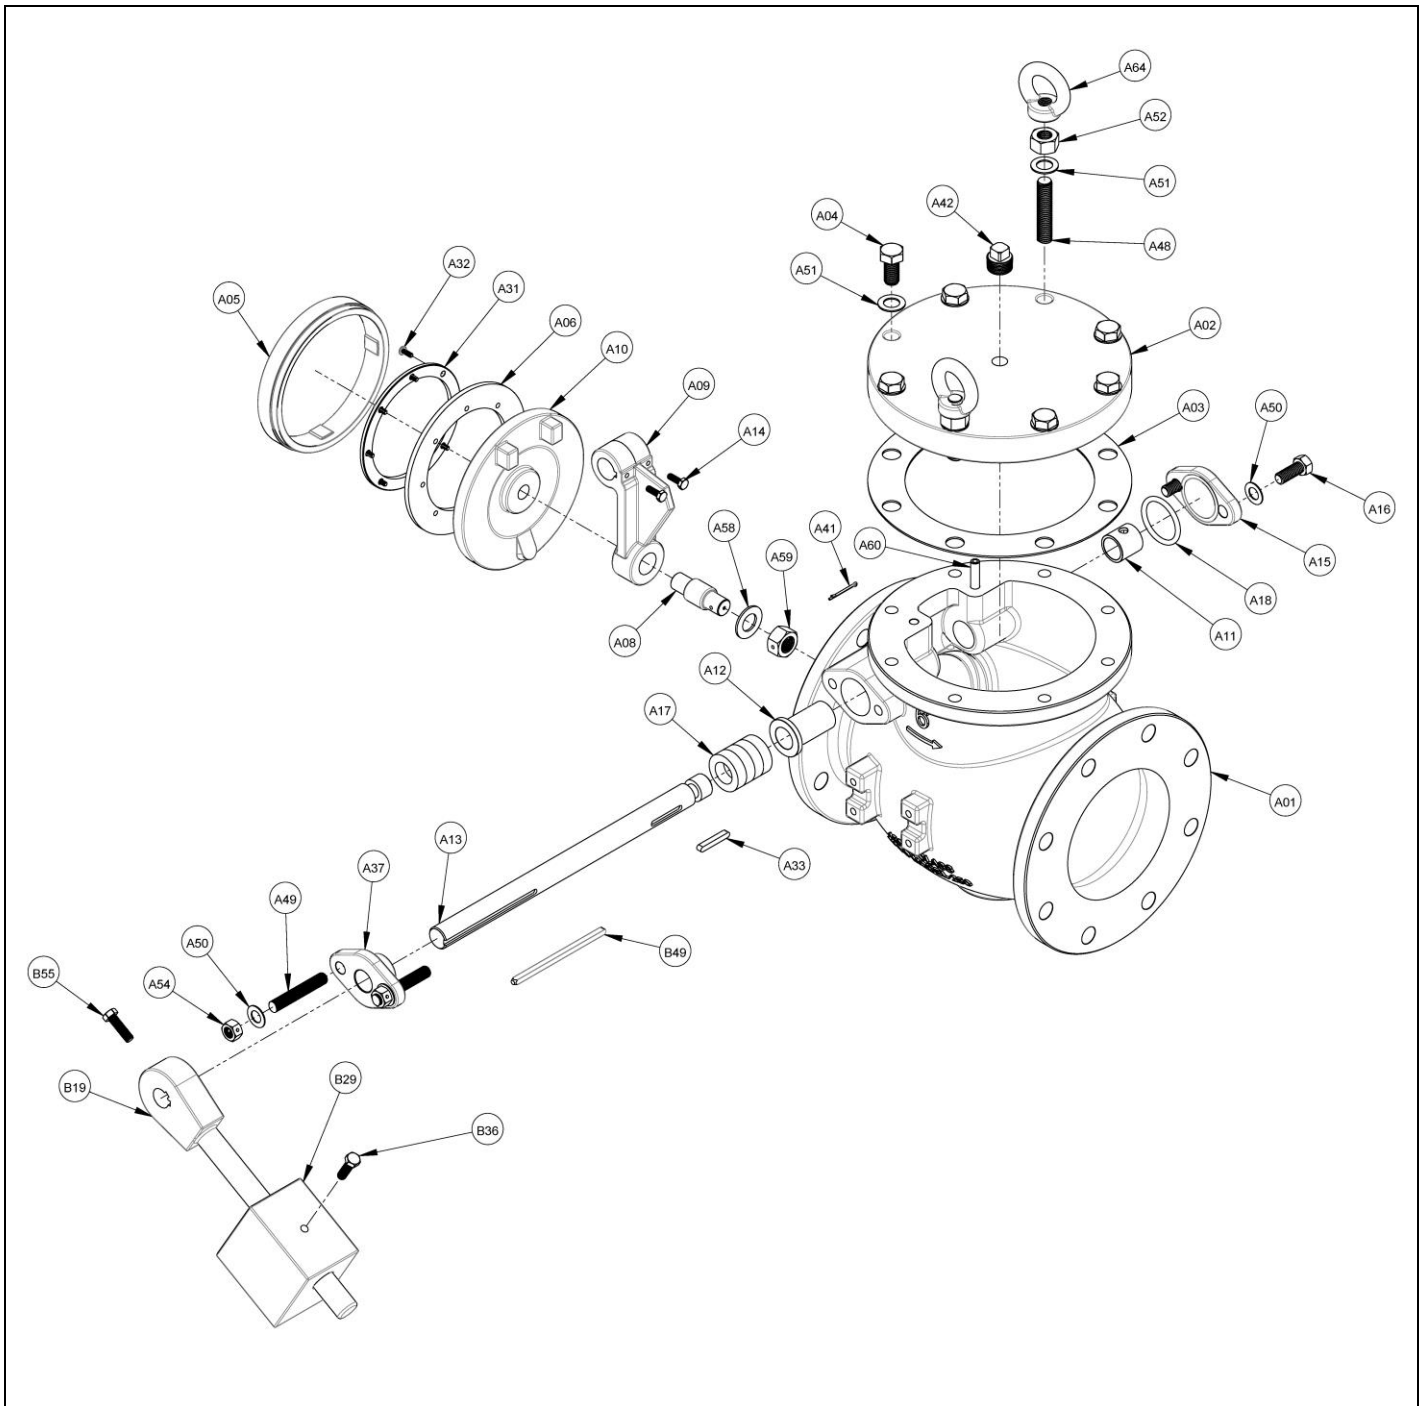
CVS-250/250A Swing Check Valve (Lever & Weight)
